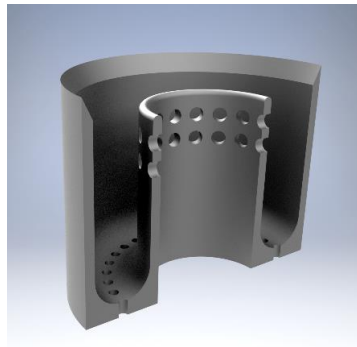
Cut-out of the CAD drawing of the liquid distributor.
